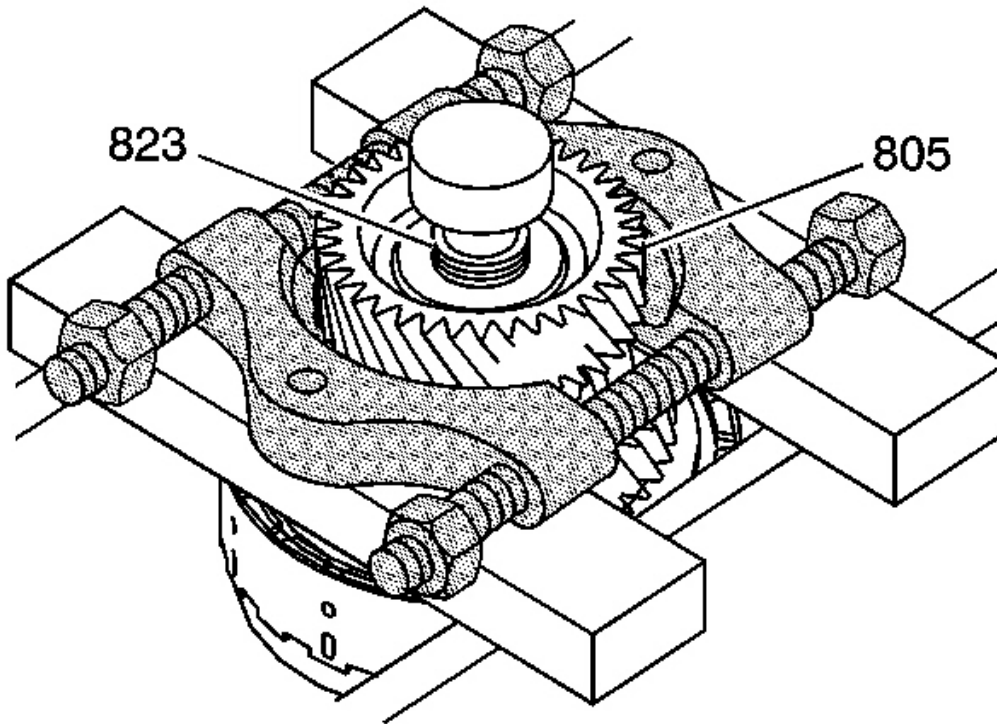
Removing 3rd Driven Gear Using A Hydraulic Press & J 22912-01
